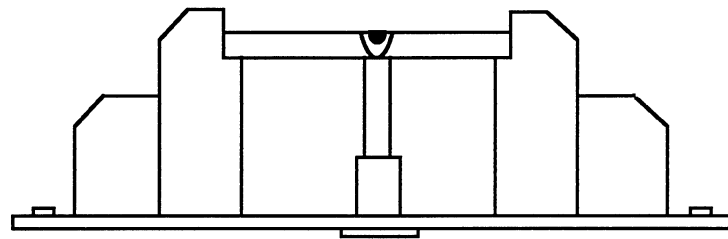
Dimension Drawing of the UT86-2 x 40C Board
